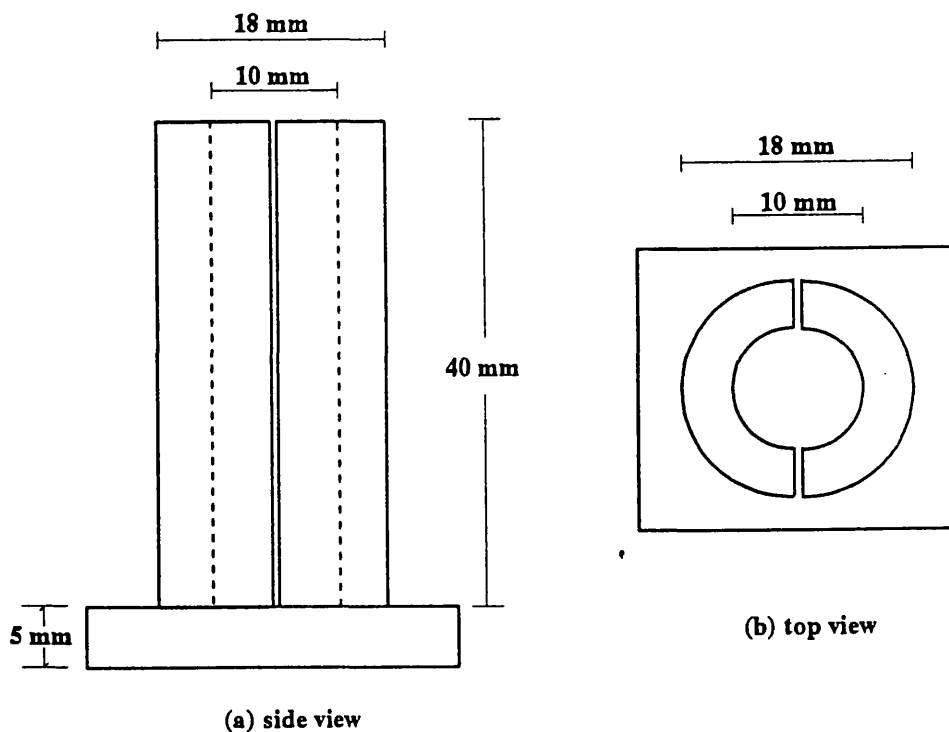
Stainless steel cylindrical split mould for casting glass sample.
